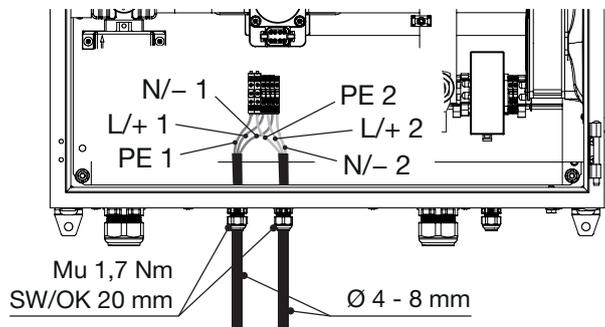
Connecting the power supply ( $\mu$  – tightening torque, SW/OK – mounting wrench size)
